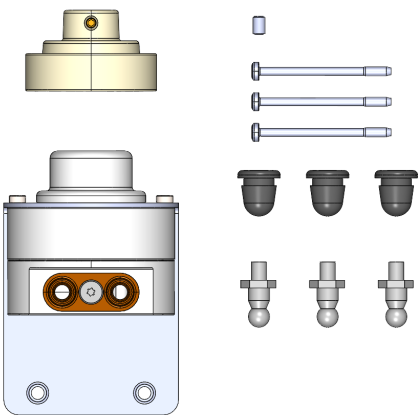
Gear pump FPA (art.no. 34562330)
